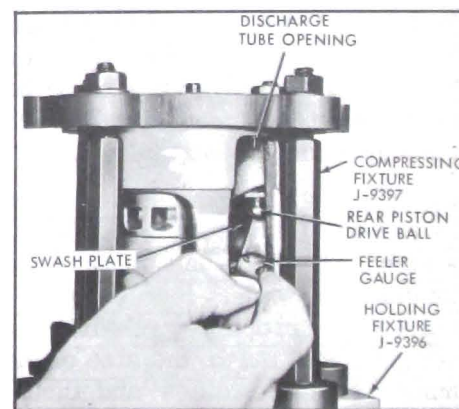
Gauging Clearance Between Rear Drive Ball and Swashplate
